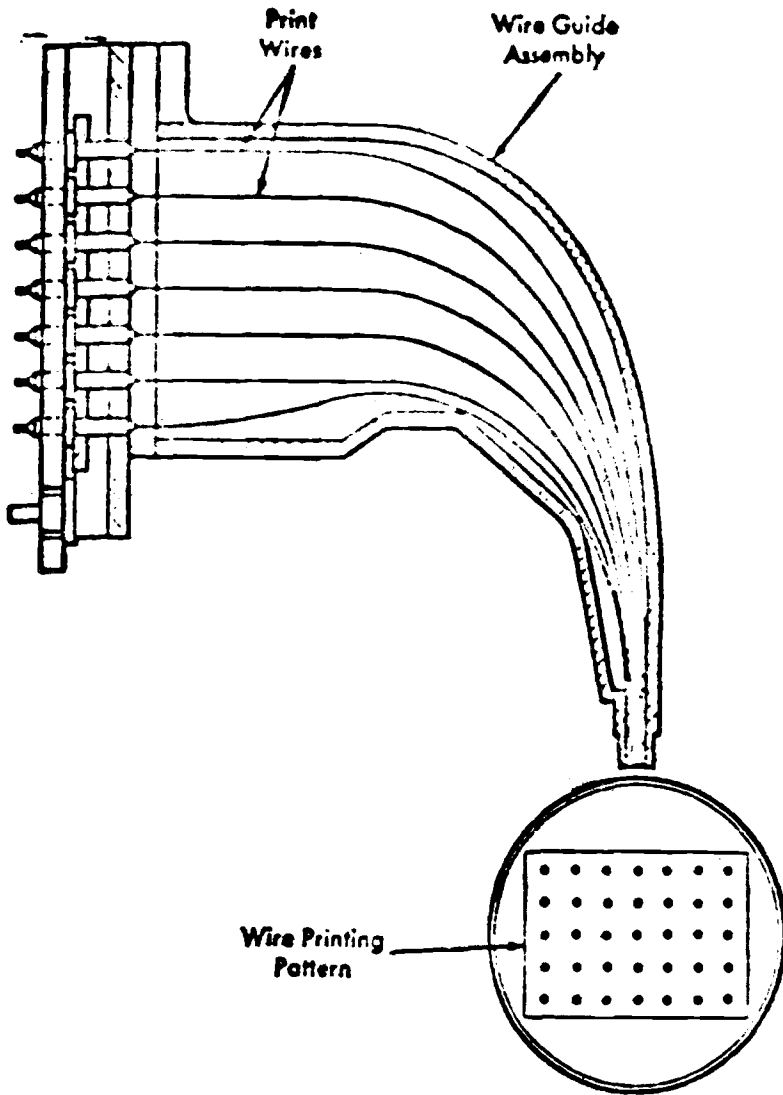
Enlarged line drawing of the printing element and the wire printing pattern.
